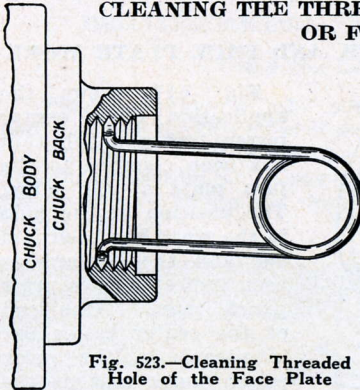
Cleaning Threaded Hole of the Face Plate
